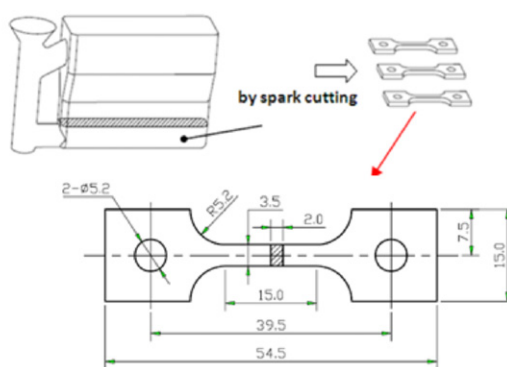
Photo of the castings and gage dimension of rectangle tensile specimen.
